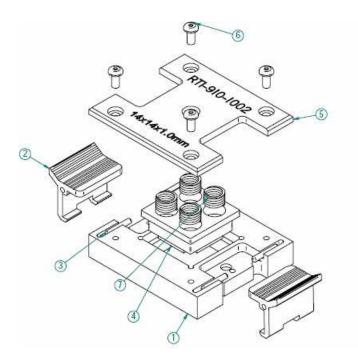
High speed dual channel 6-bit ADC (TQFN packaged) mounting socket dual latch lid assembly: 1 - Lid base, 2 - Latch, 3 - Dowel pin, 4 - Pressure plate, 5 - Lid top, 6 - Button head screw, 7 - Spring
